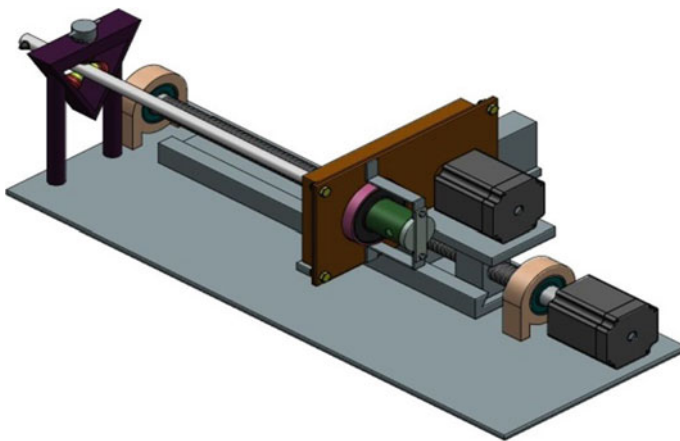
Entire internal bore welding torch assembly bed
